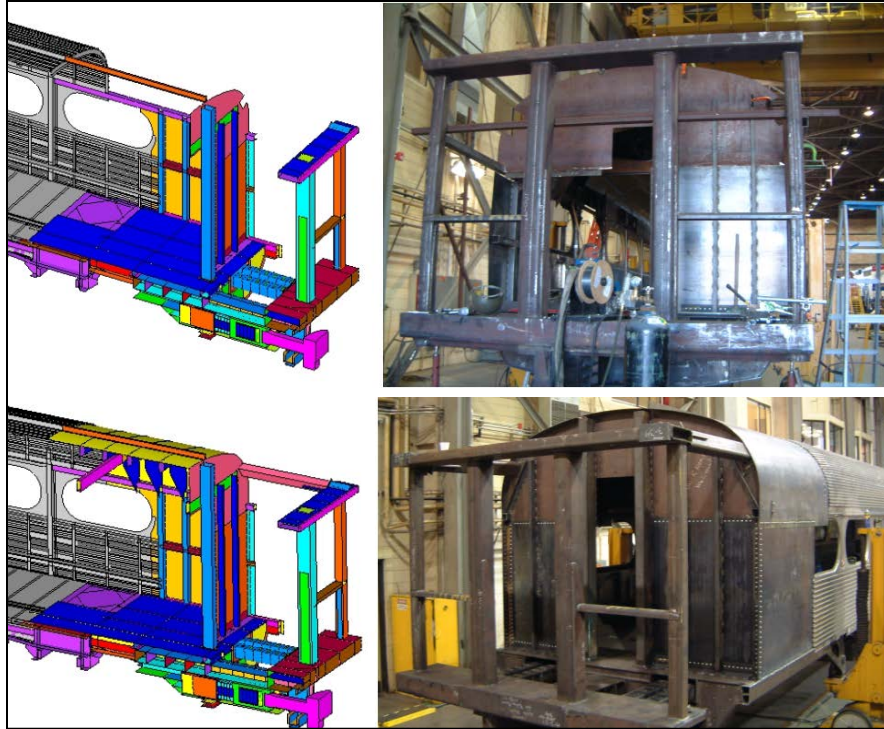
Final Assembly Stage: Placement of Partition Wall and Roof
